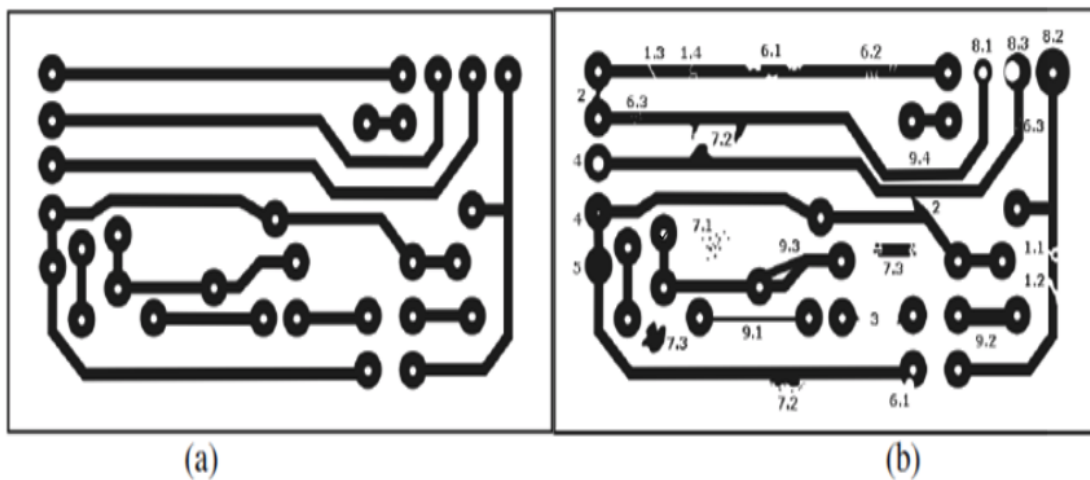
Classification of the bare PCB defects [22]
